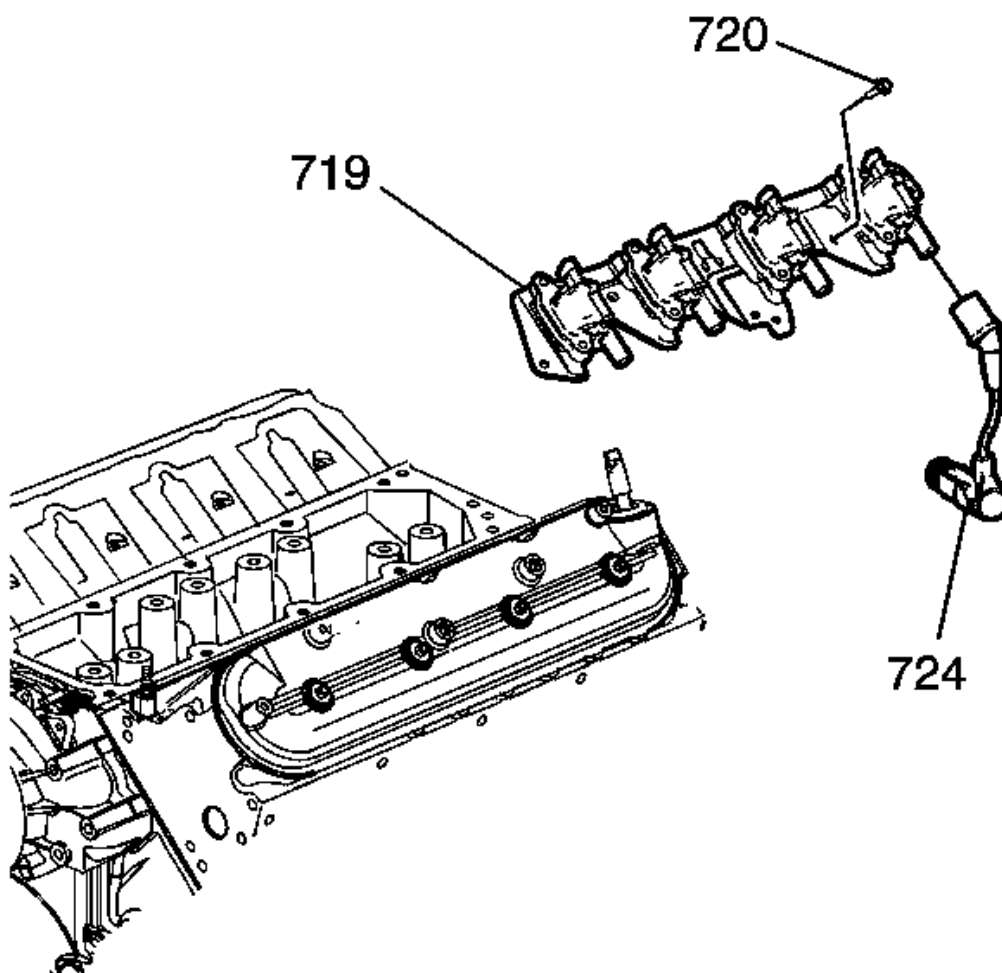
Identifying Valve Rocker Arm Cover Attachments
